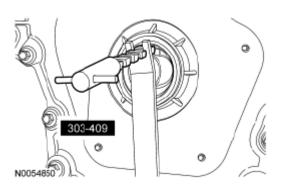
Removing Crankshaft Front Seal Courtesy of FORD MOTOR CO.
